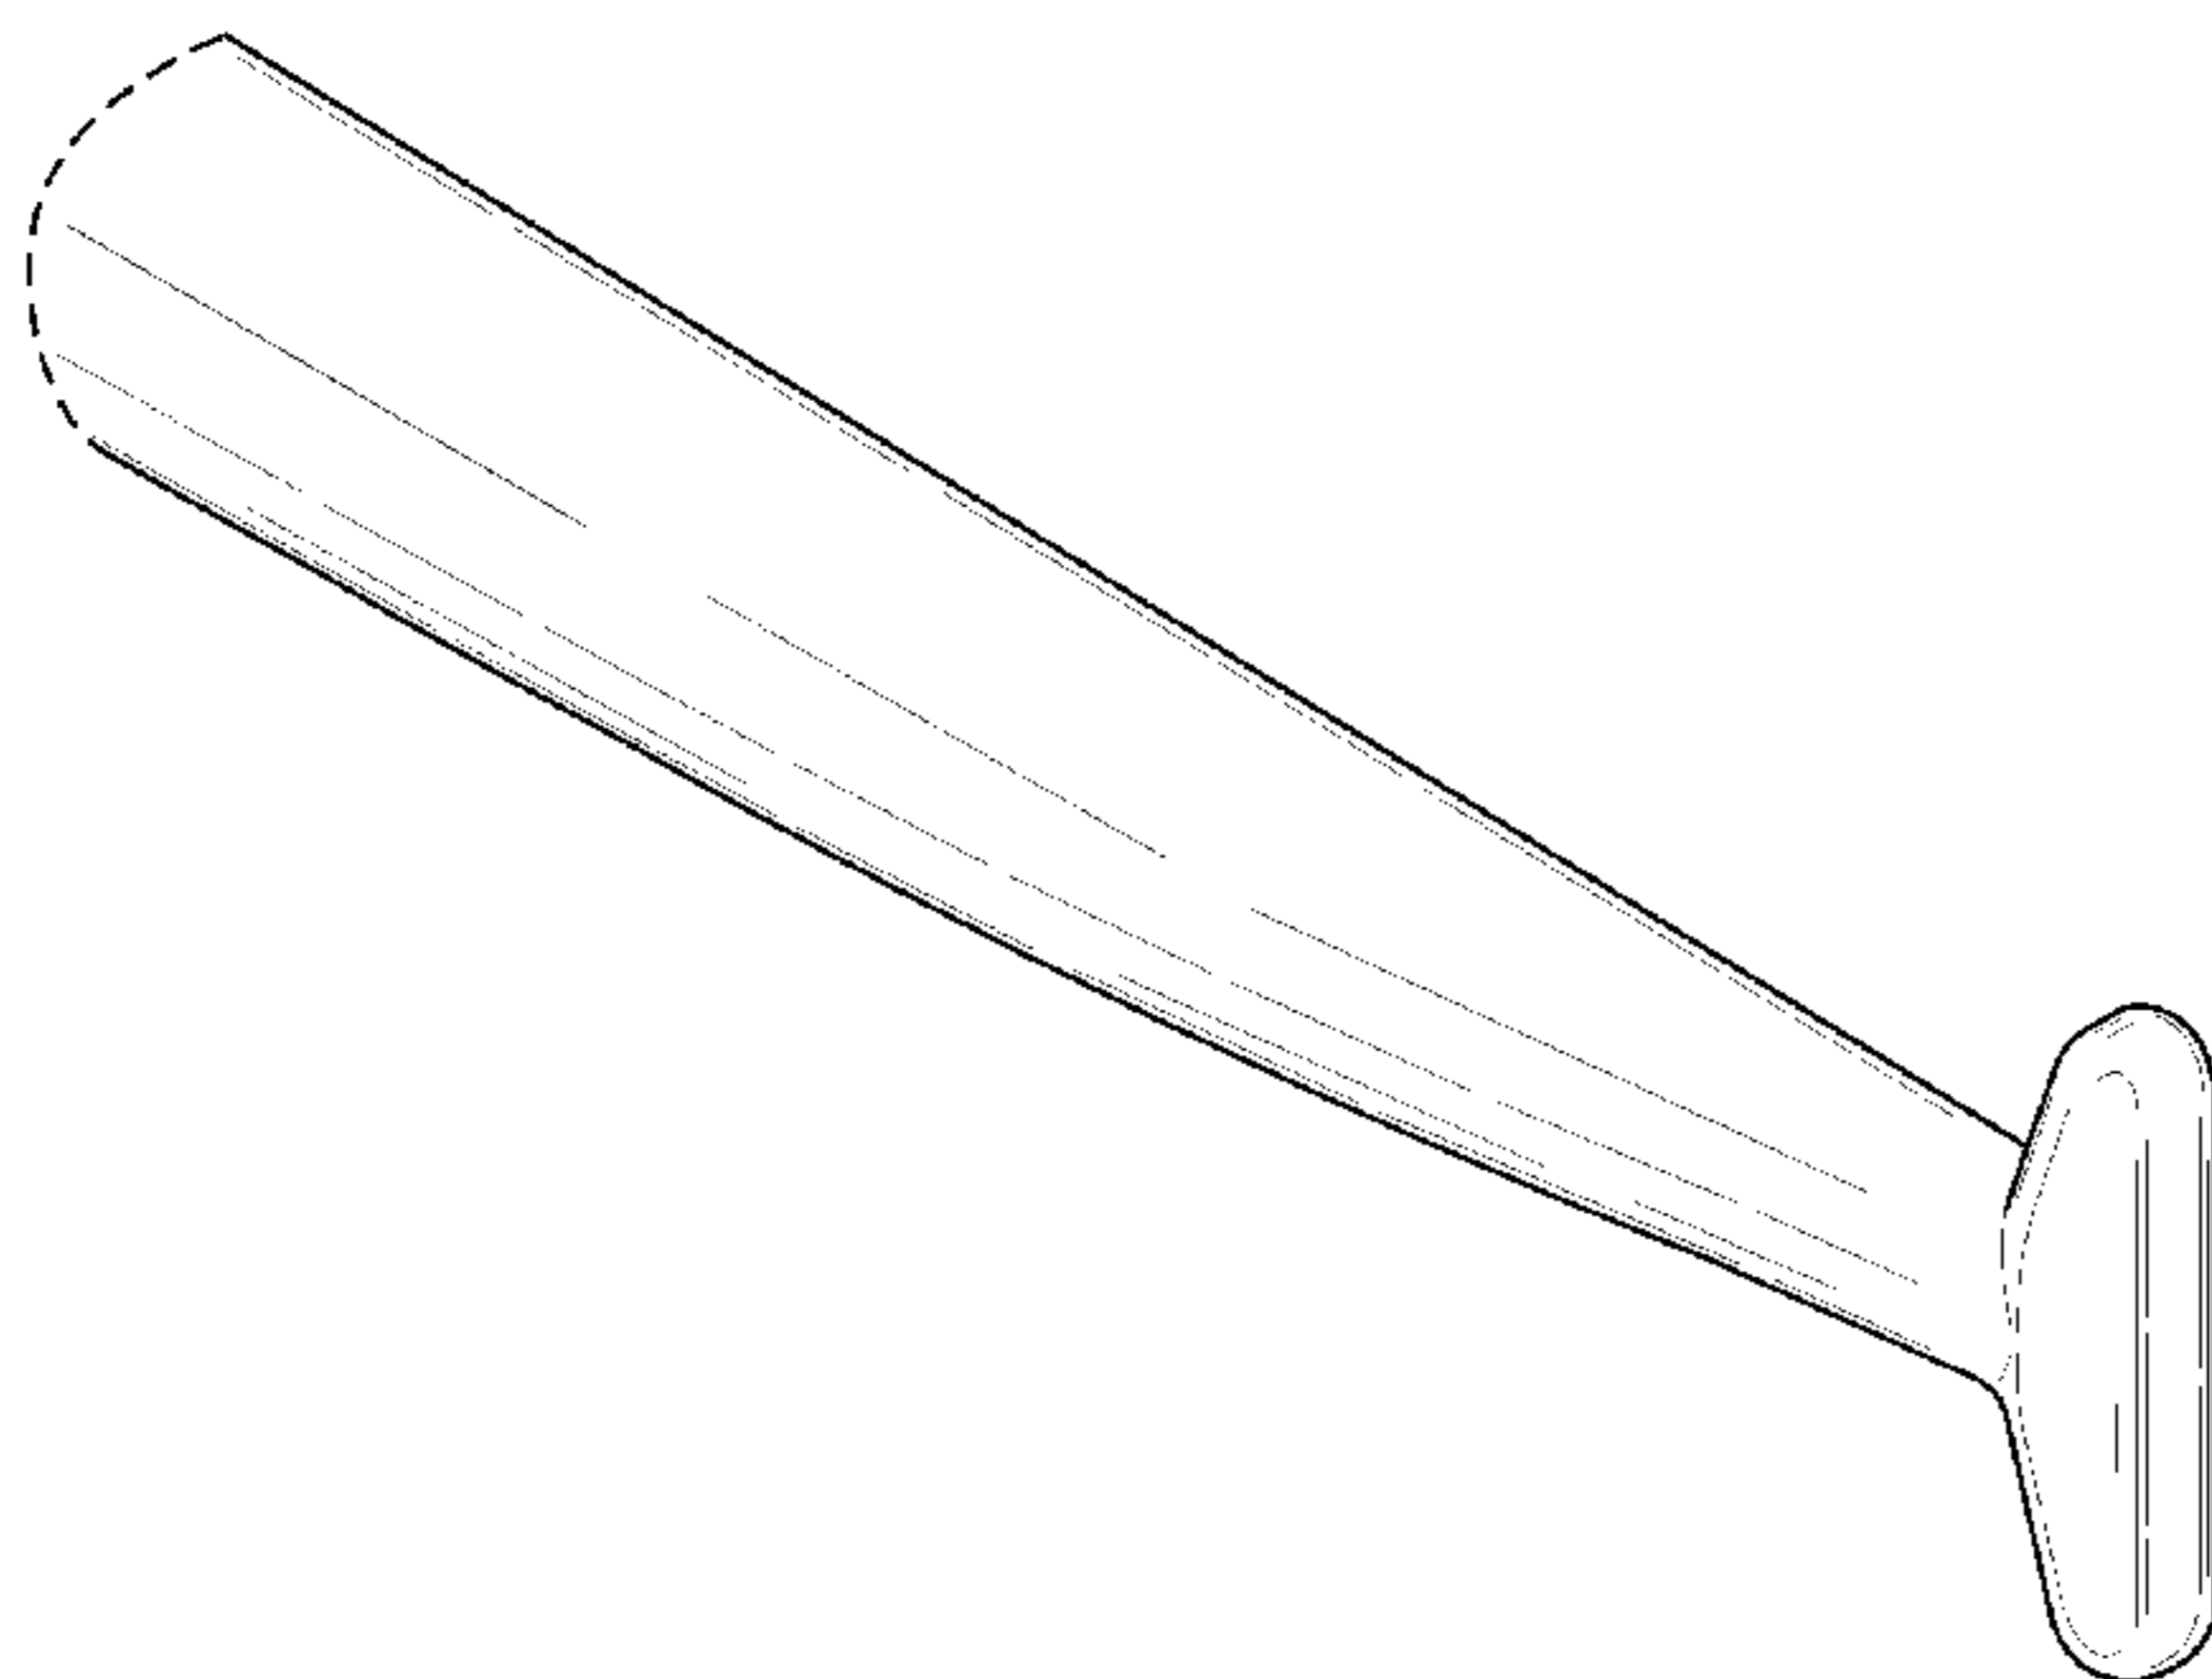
is a front view of the cable guide projection of FIG. 1;
